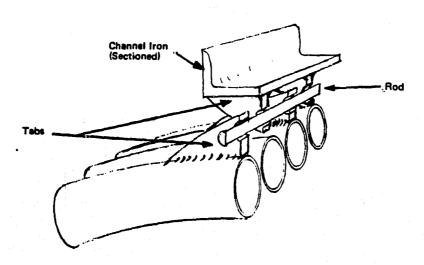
Cross Section of Absorber Stiffening Frame Detail Showing Fastening Method Permitting Some Freedom of Movement for the Tubes
